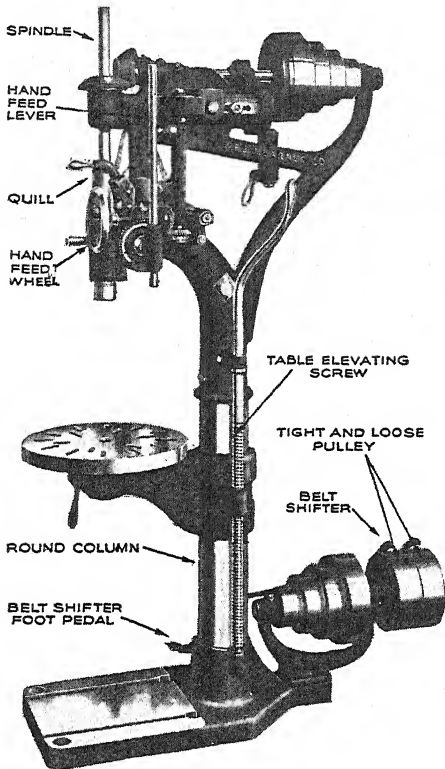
The W. F. and John Barnes No. 146 20-In. Single-Spindle Drill Press.
